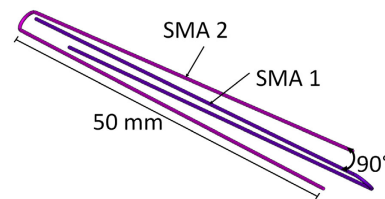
Wire arrangement inside the proof-of-concept prototype.^[31]
